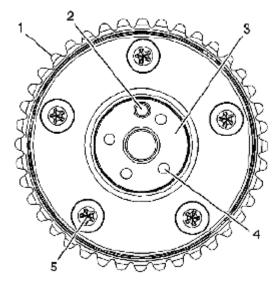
Inspecting Front Of Left Intake Camshaft Position Actuators Courtesy of SUZUKI OF AMERICA CORP.
